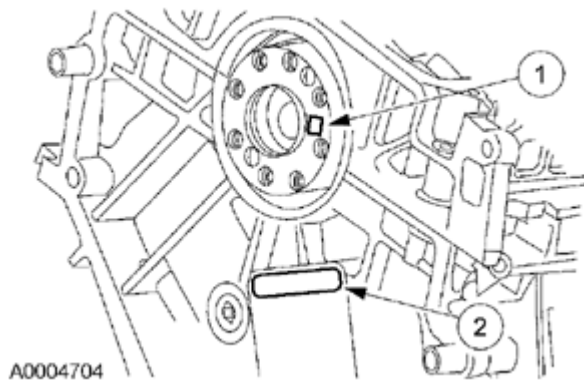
Locating Code On Crankshaft Flange And Code On Cylinder Block Rear Face
